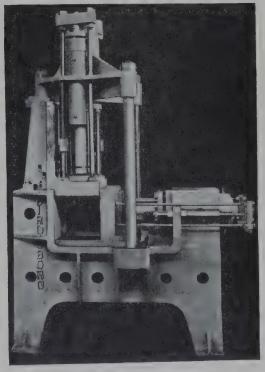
Side ram press. (Courtesy of Birdsboro Steel Foundry and Machine Company.)
